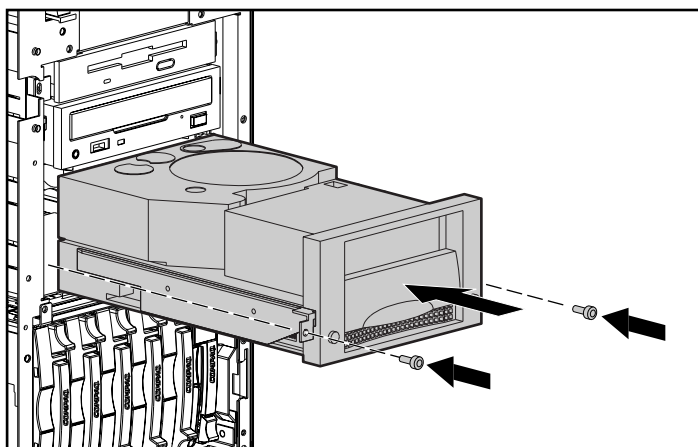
Installing a full-height DLT tape drive in the removable media area
